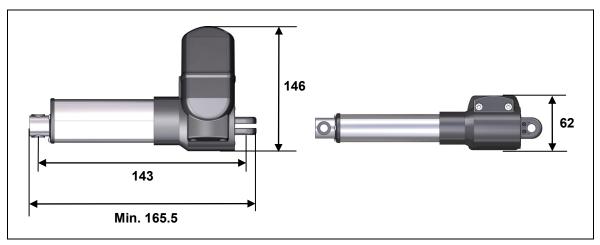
Dimensions of ALPHADRIVE drive stroke pipe with hole (in mm) Minimum installation dimension: 143 mm
